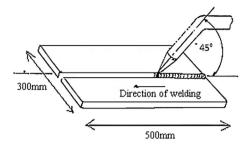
Schematic diagram of joint geometry and plate dimensions.
